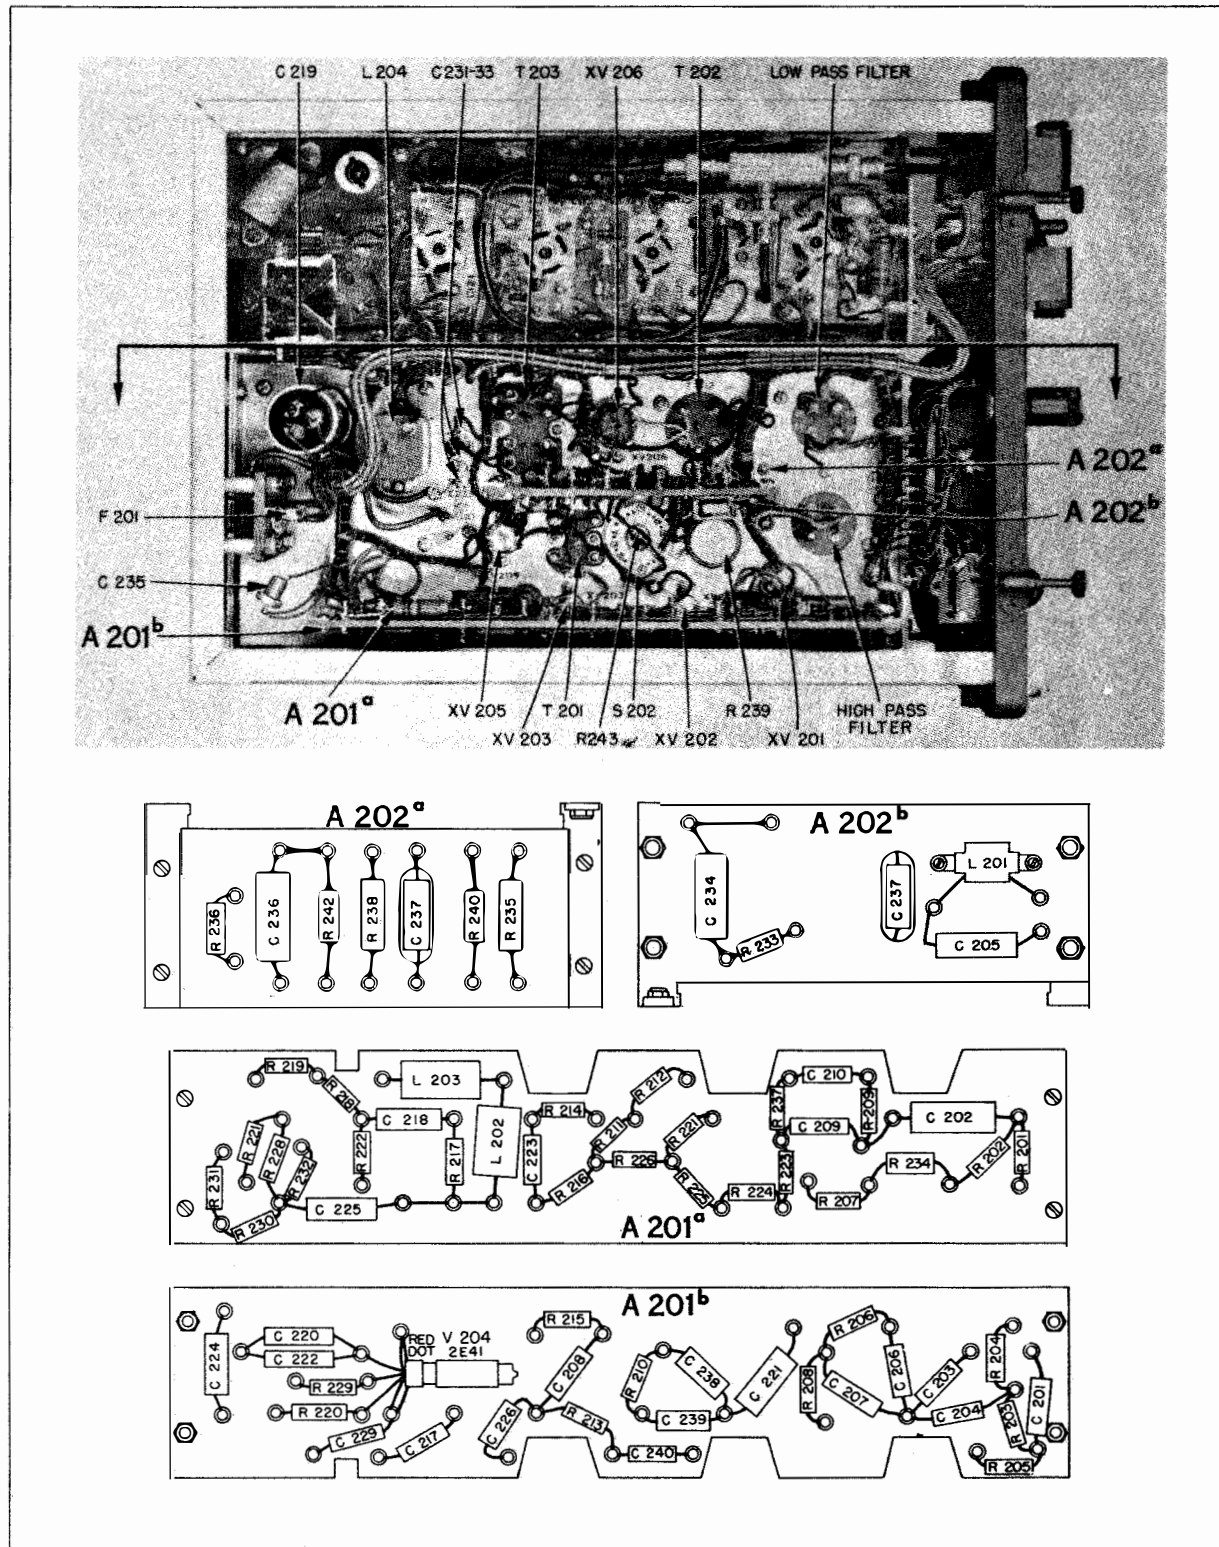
Underside of IF-AF Chassis, Showing Component Locations.
